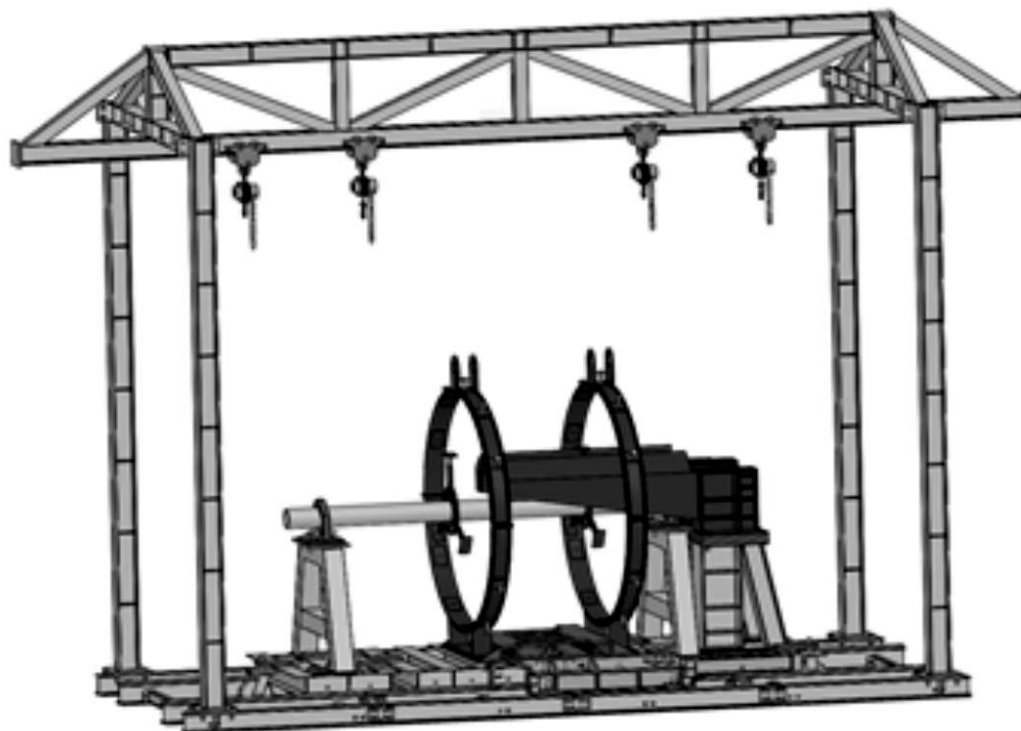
The 3D CAD model of the magnet-cryostat assembly station.
